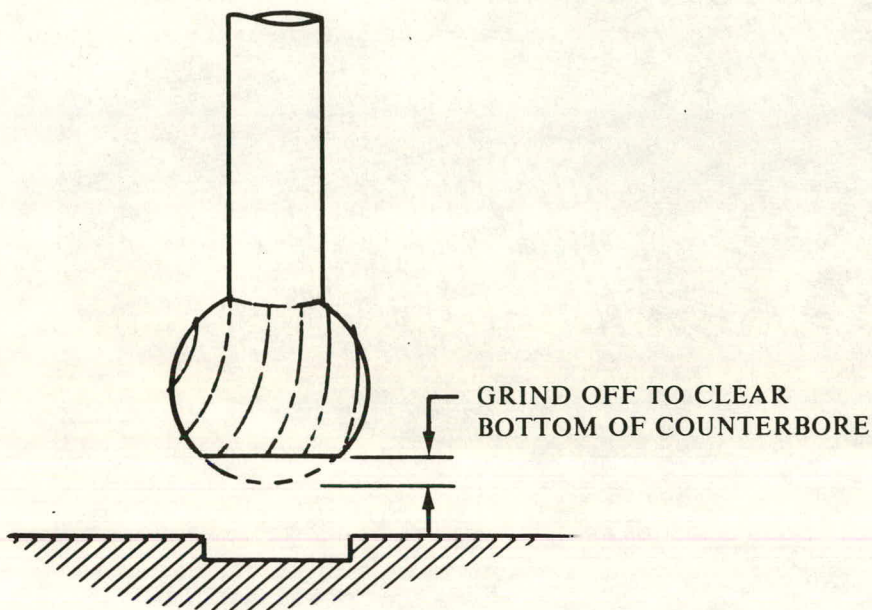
Burr Ball Altered to Deburr Shallow Counterbore Diameter
